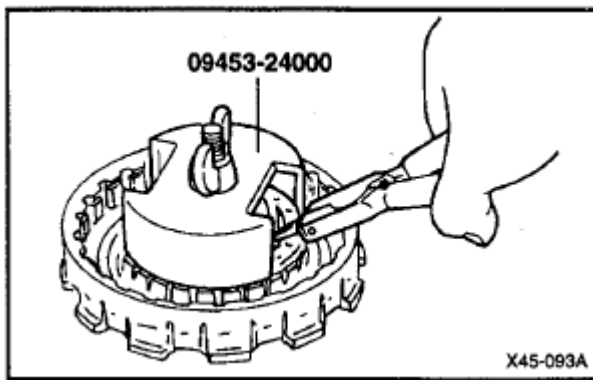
Compressing Return Spring With Special Tool & Removing Snap Ring
